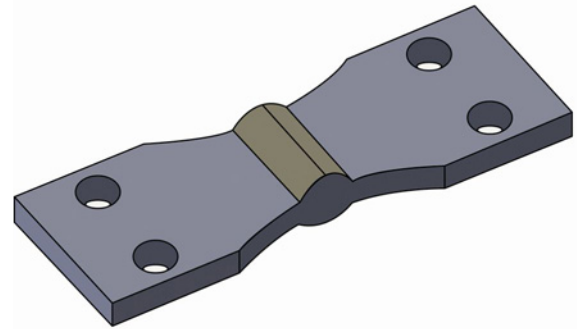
Schematic view of the fatigue test specimen for plane bending cyclic loading.
